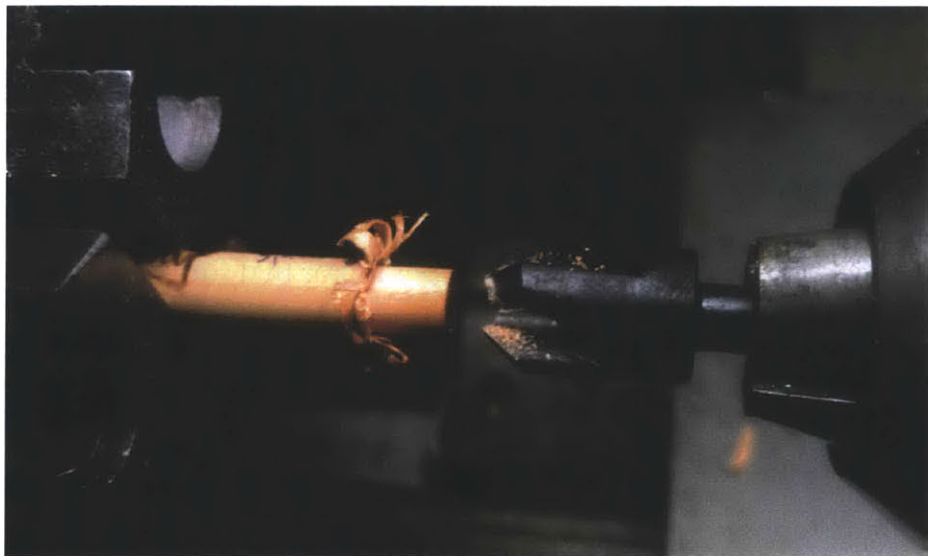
The plug cutter being tested in the lathe. The cut doesn't create a clean shoulder and is not suitable for Sprout.
